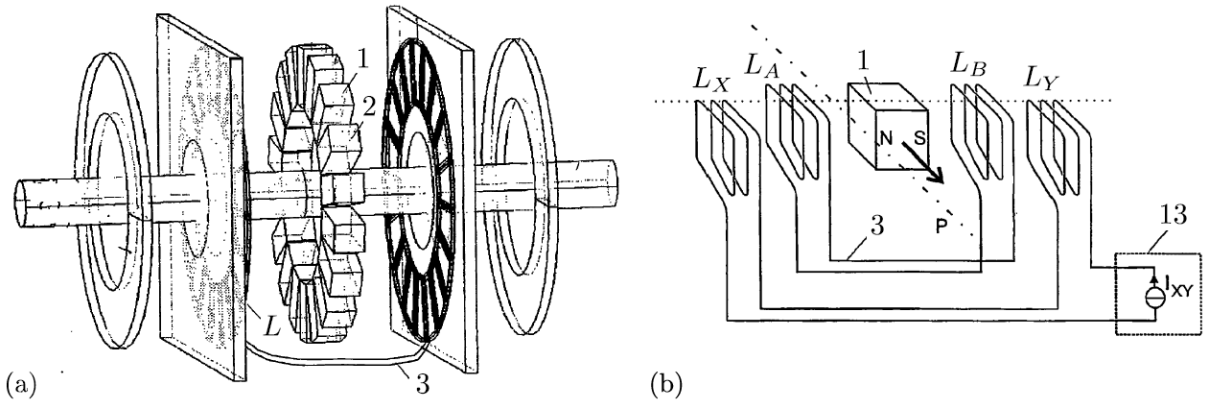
Thrust self-bearing machine (from [32]). (a) Exploded view. (b) Detailed view.
